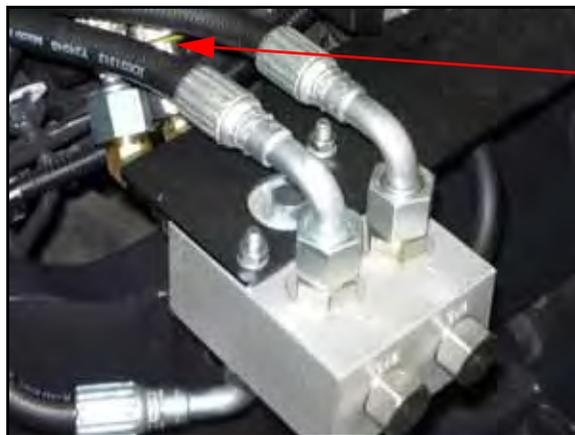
Hydraulic Hose Installed on SmarTrax Valve
